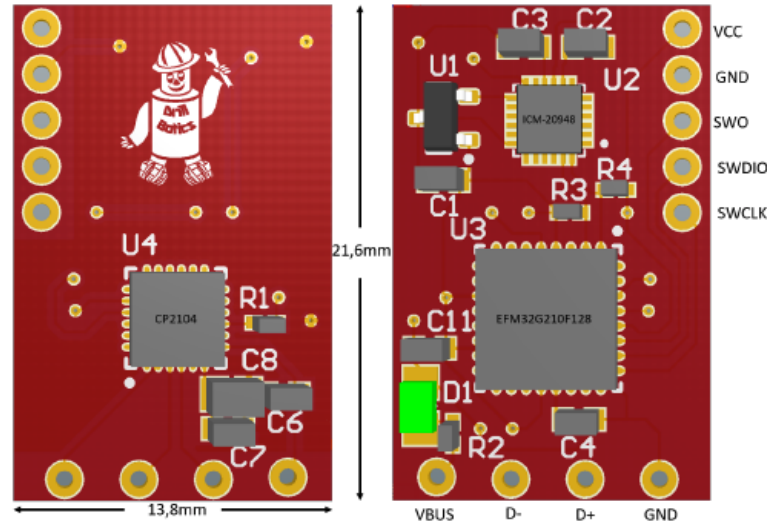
PCB 2D model of the sensor card with component placement, input/output pins and dimensions [37].
